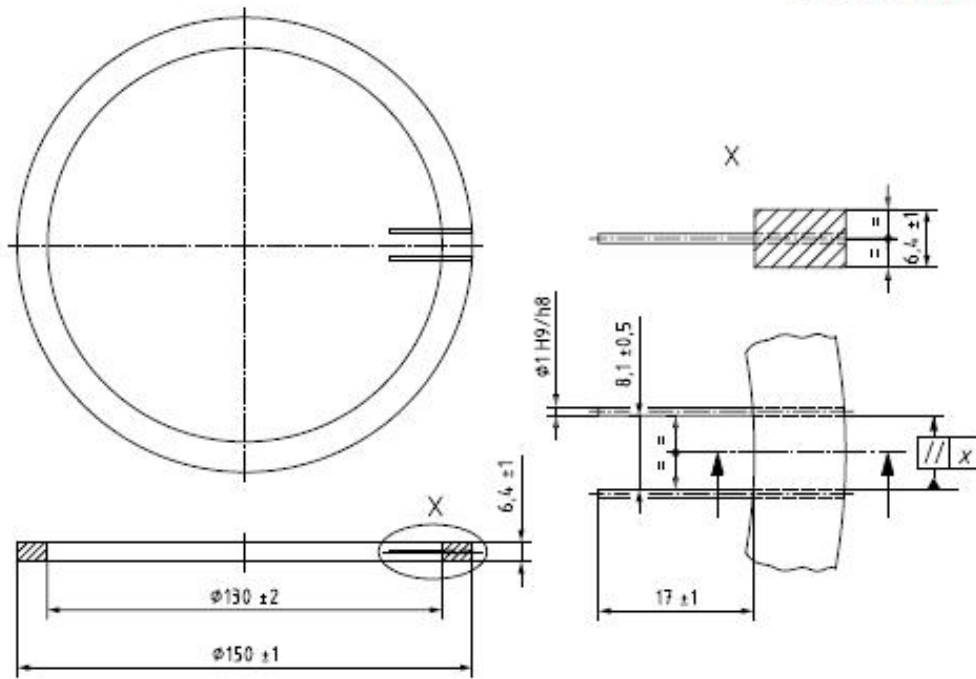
Views of the metal rim, with expanded view of pin placement for cigarettes of 8 mm diameter
